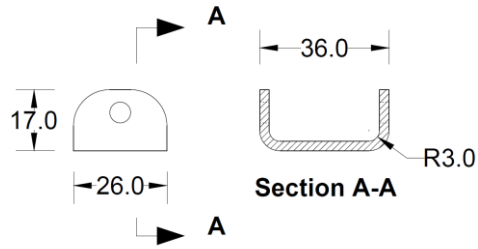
Details of secondary lock channel (all dimensions are in mm, steel plate gauge 12).
